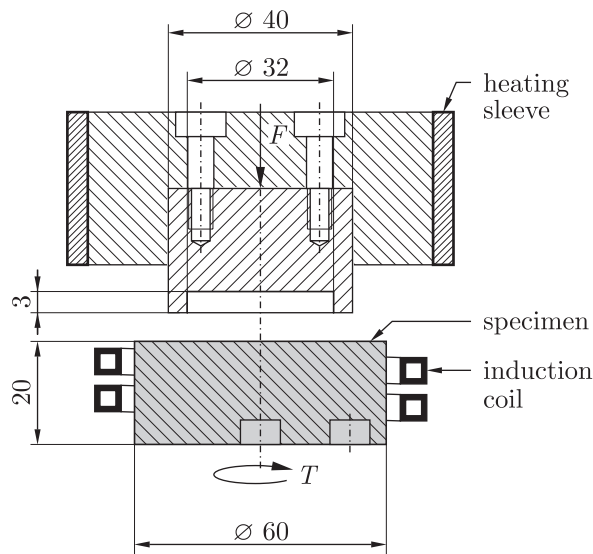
The toolkit used in the preliminary warm forging tests with classical ring-on-disc configuration.
